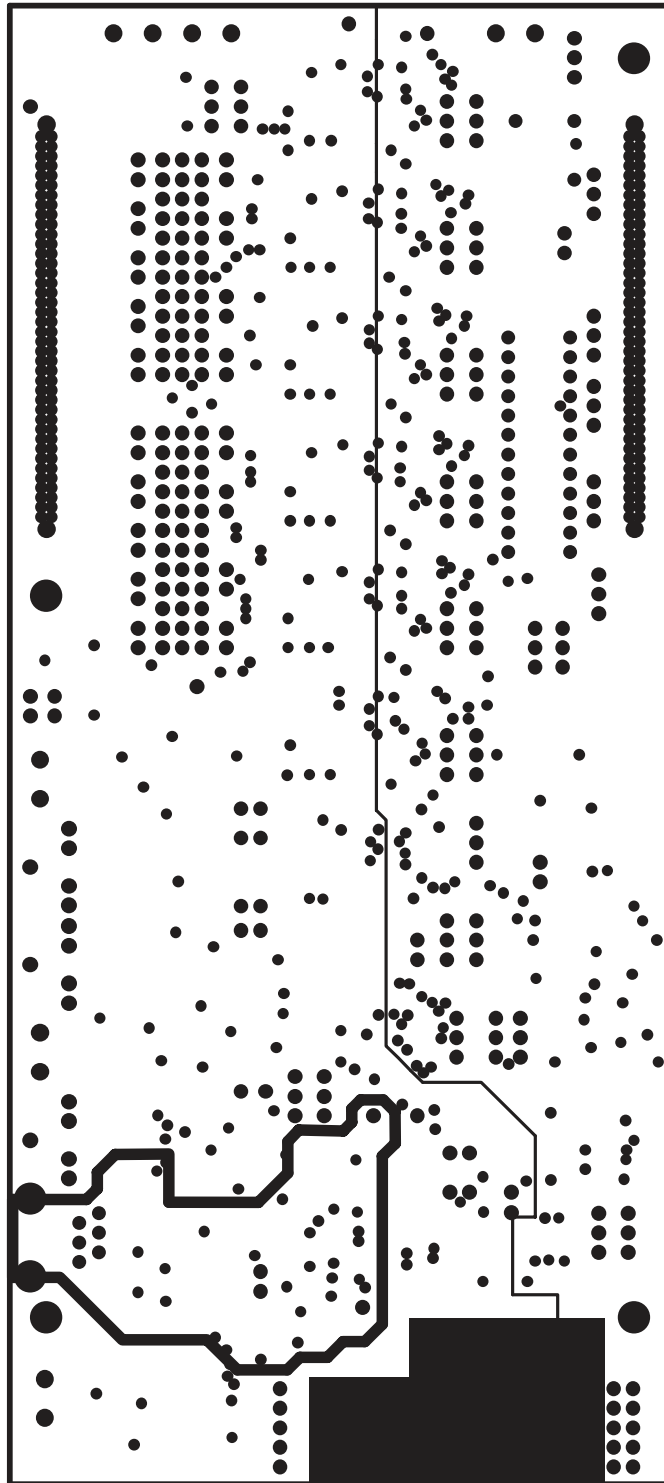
Printed-Circuit Board Layer 5 (Rev. C)
